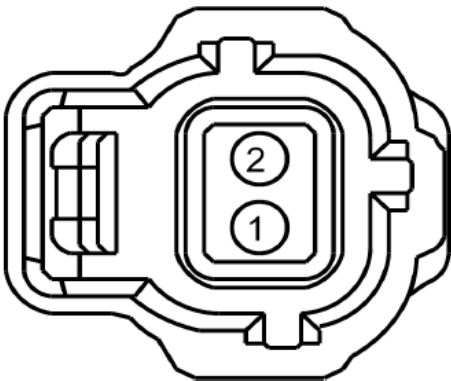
Power Steering Pressure Switch Connector End View (C121)
